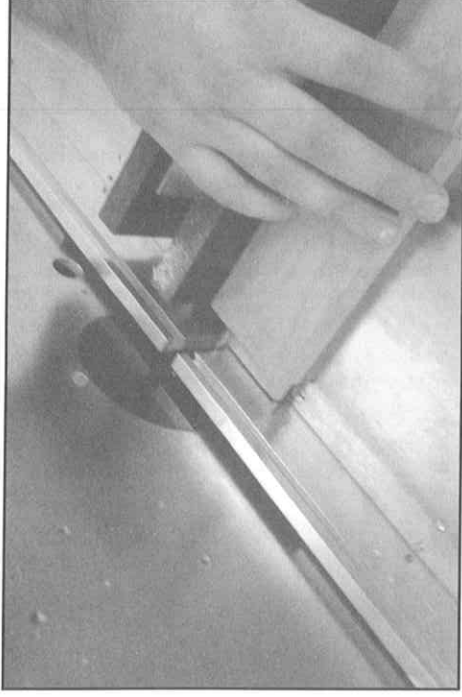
A mitre gauge or push block is used to make upper tongue cuts.
